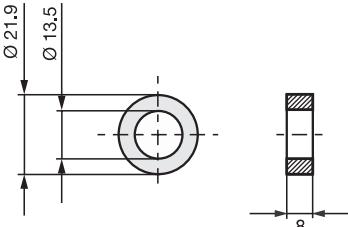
Installation dimensions of BTL-P-1014-2R magnet
